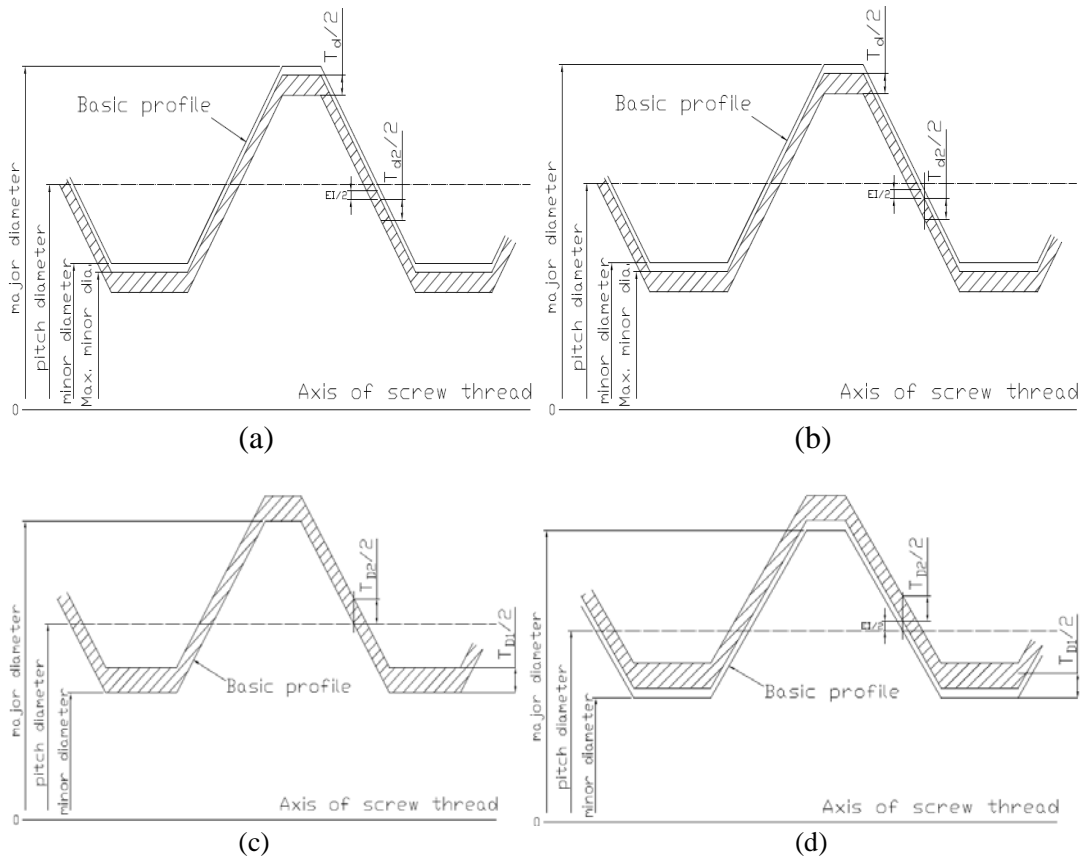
Thread profiles: a) tolerance position 6az for external threads; b) tolerance position 6g or 8g for external threads; c) tolerance position 6H or 7H for internal threads; d) tolerance position 6AZ for internal threads
